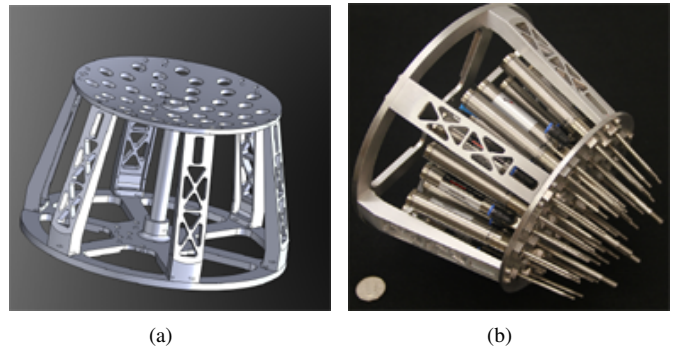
Housing assembly (a) CAD model (b) Final machined assembly
